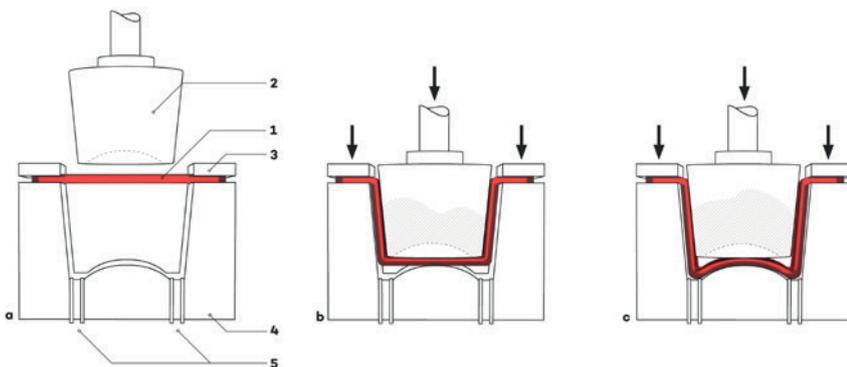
Vacuum-forming into a female mold with mechanical pre-stretching. PLEXIGLAS® (1), plug (2), clamping frame (3), female mold (4), suction ducts (5).
